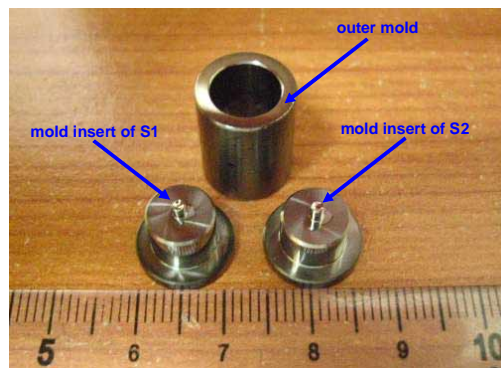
Picture of the mold inserts of two lens surfaces and the outer mold.
